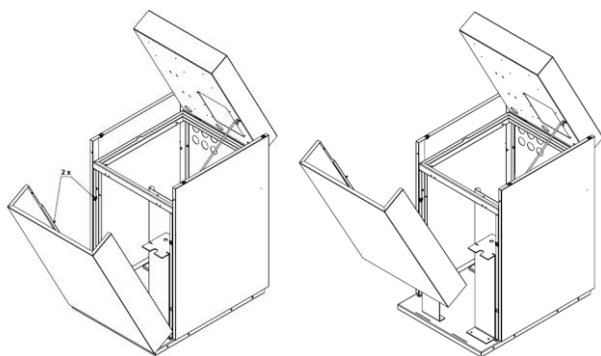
Disassembly process of the front cover of Clausius heat pumps with Classic configuration.
